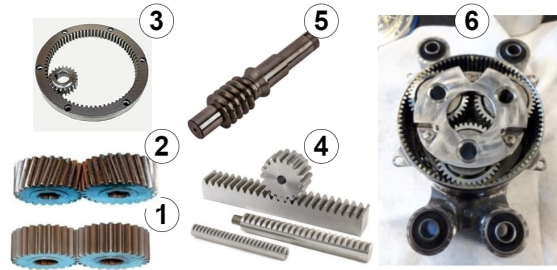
Examples of type of products that Hankamp produces. Due to confidentiality, numbers 1 - 5 are examples (not these exact products were produced by Hankamp Gears). Only number 6 is produced by Hankamp Gears itself.
